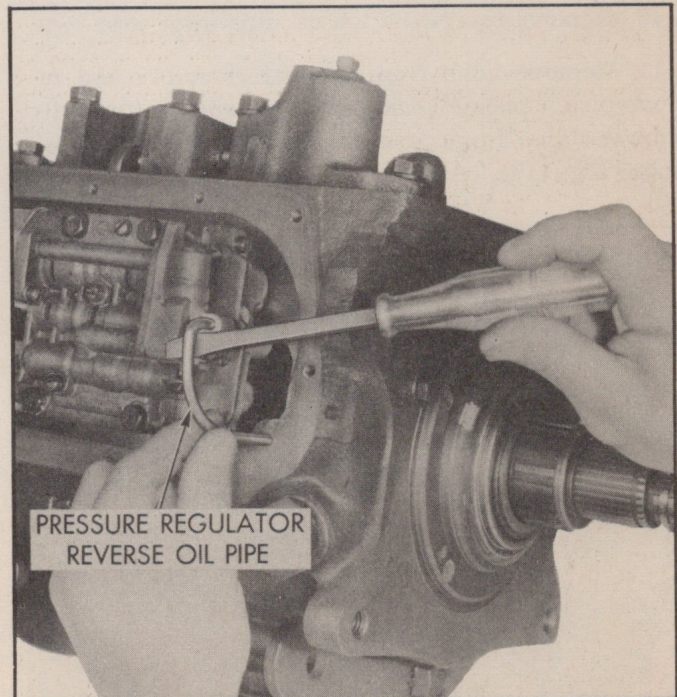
Removing Pressure Regulator Reverse Oil Pipe
